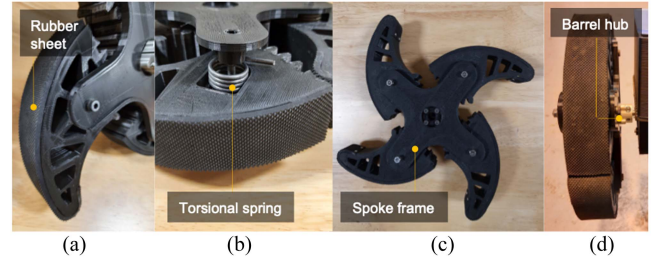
Fabrication of advanced WheelLeR in four-leg configuration with spring suspension. (a) Rubber sheet added to the leg. (b) Torsional spring inserted in the cavity of a leg. (c) Spoke frame securing the gears and the springs. (d) Connection between the wheel and the motor shaft.
